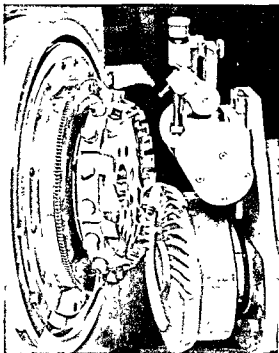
Gear blank and cutter on hypoid generator. (The Gleason Works)
